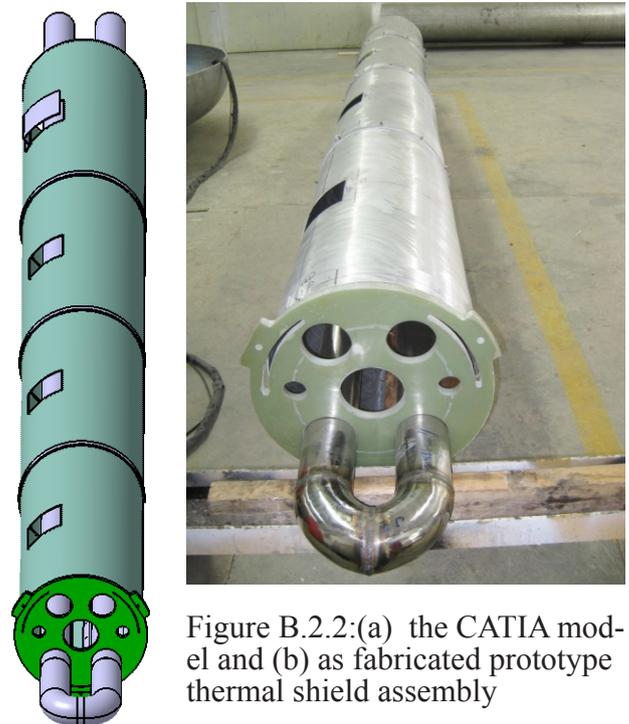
(a) the CATIA model and (b) as fabricated prototype thermal shield assembly
